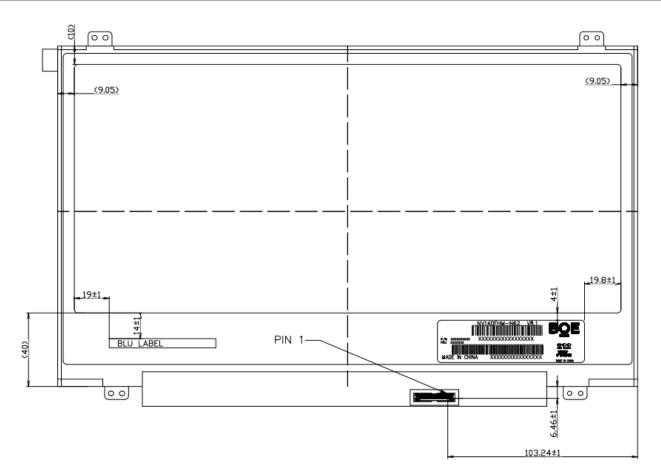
TFT-LCD Module Outline Dimensions (Rear view)
